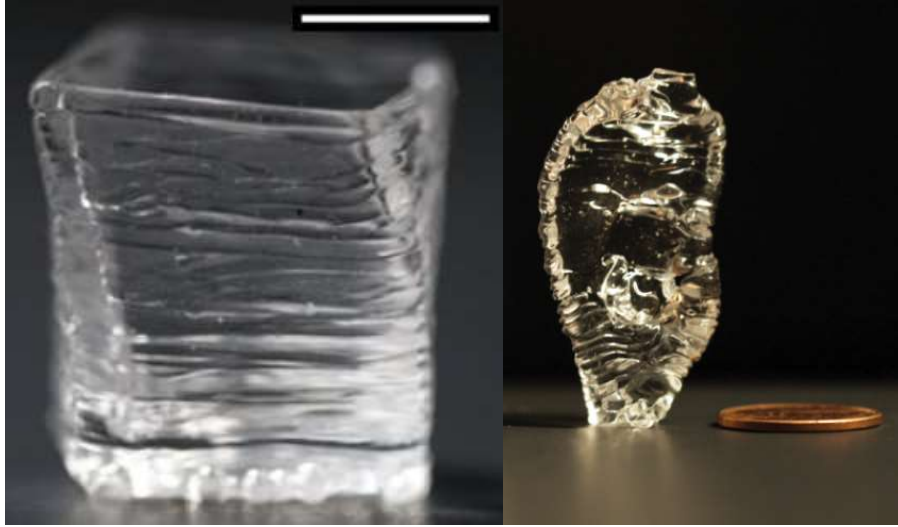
Distortion and Defect on Embedded 3D printed Parts. Reproduced with Permission from [17].
